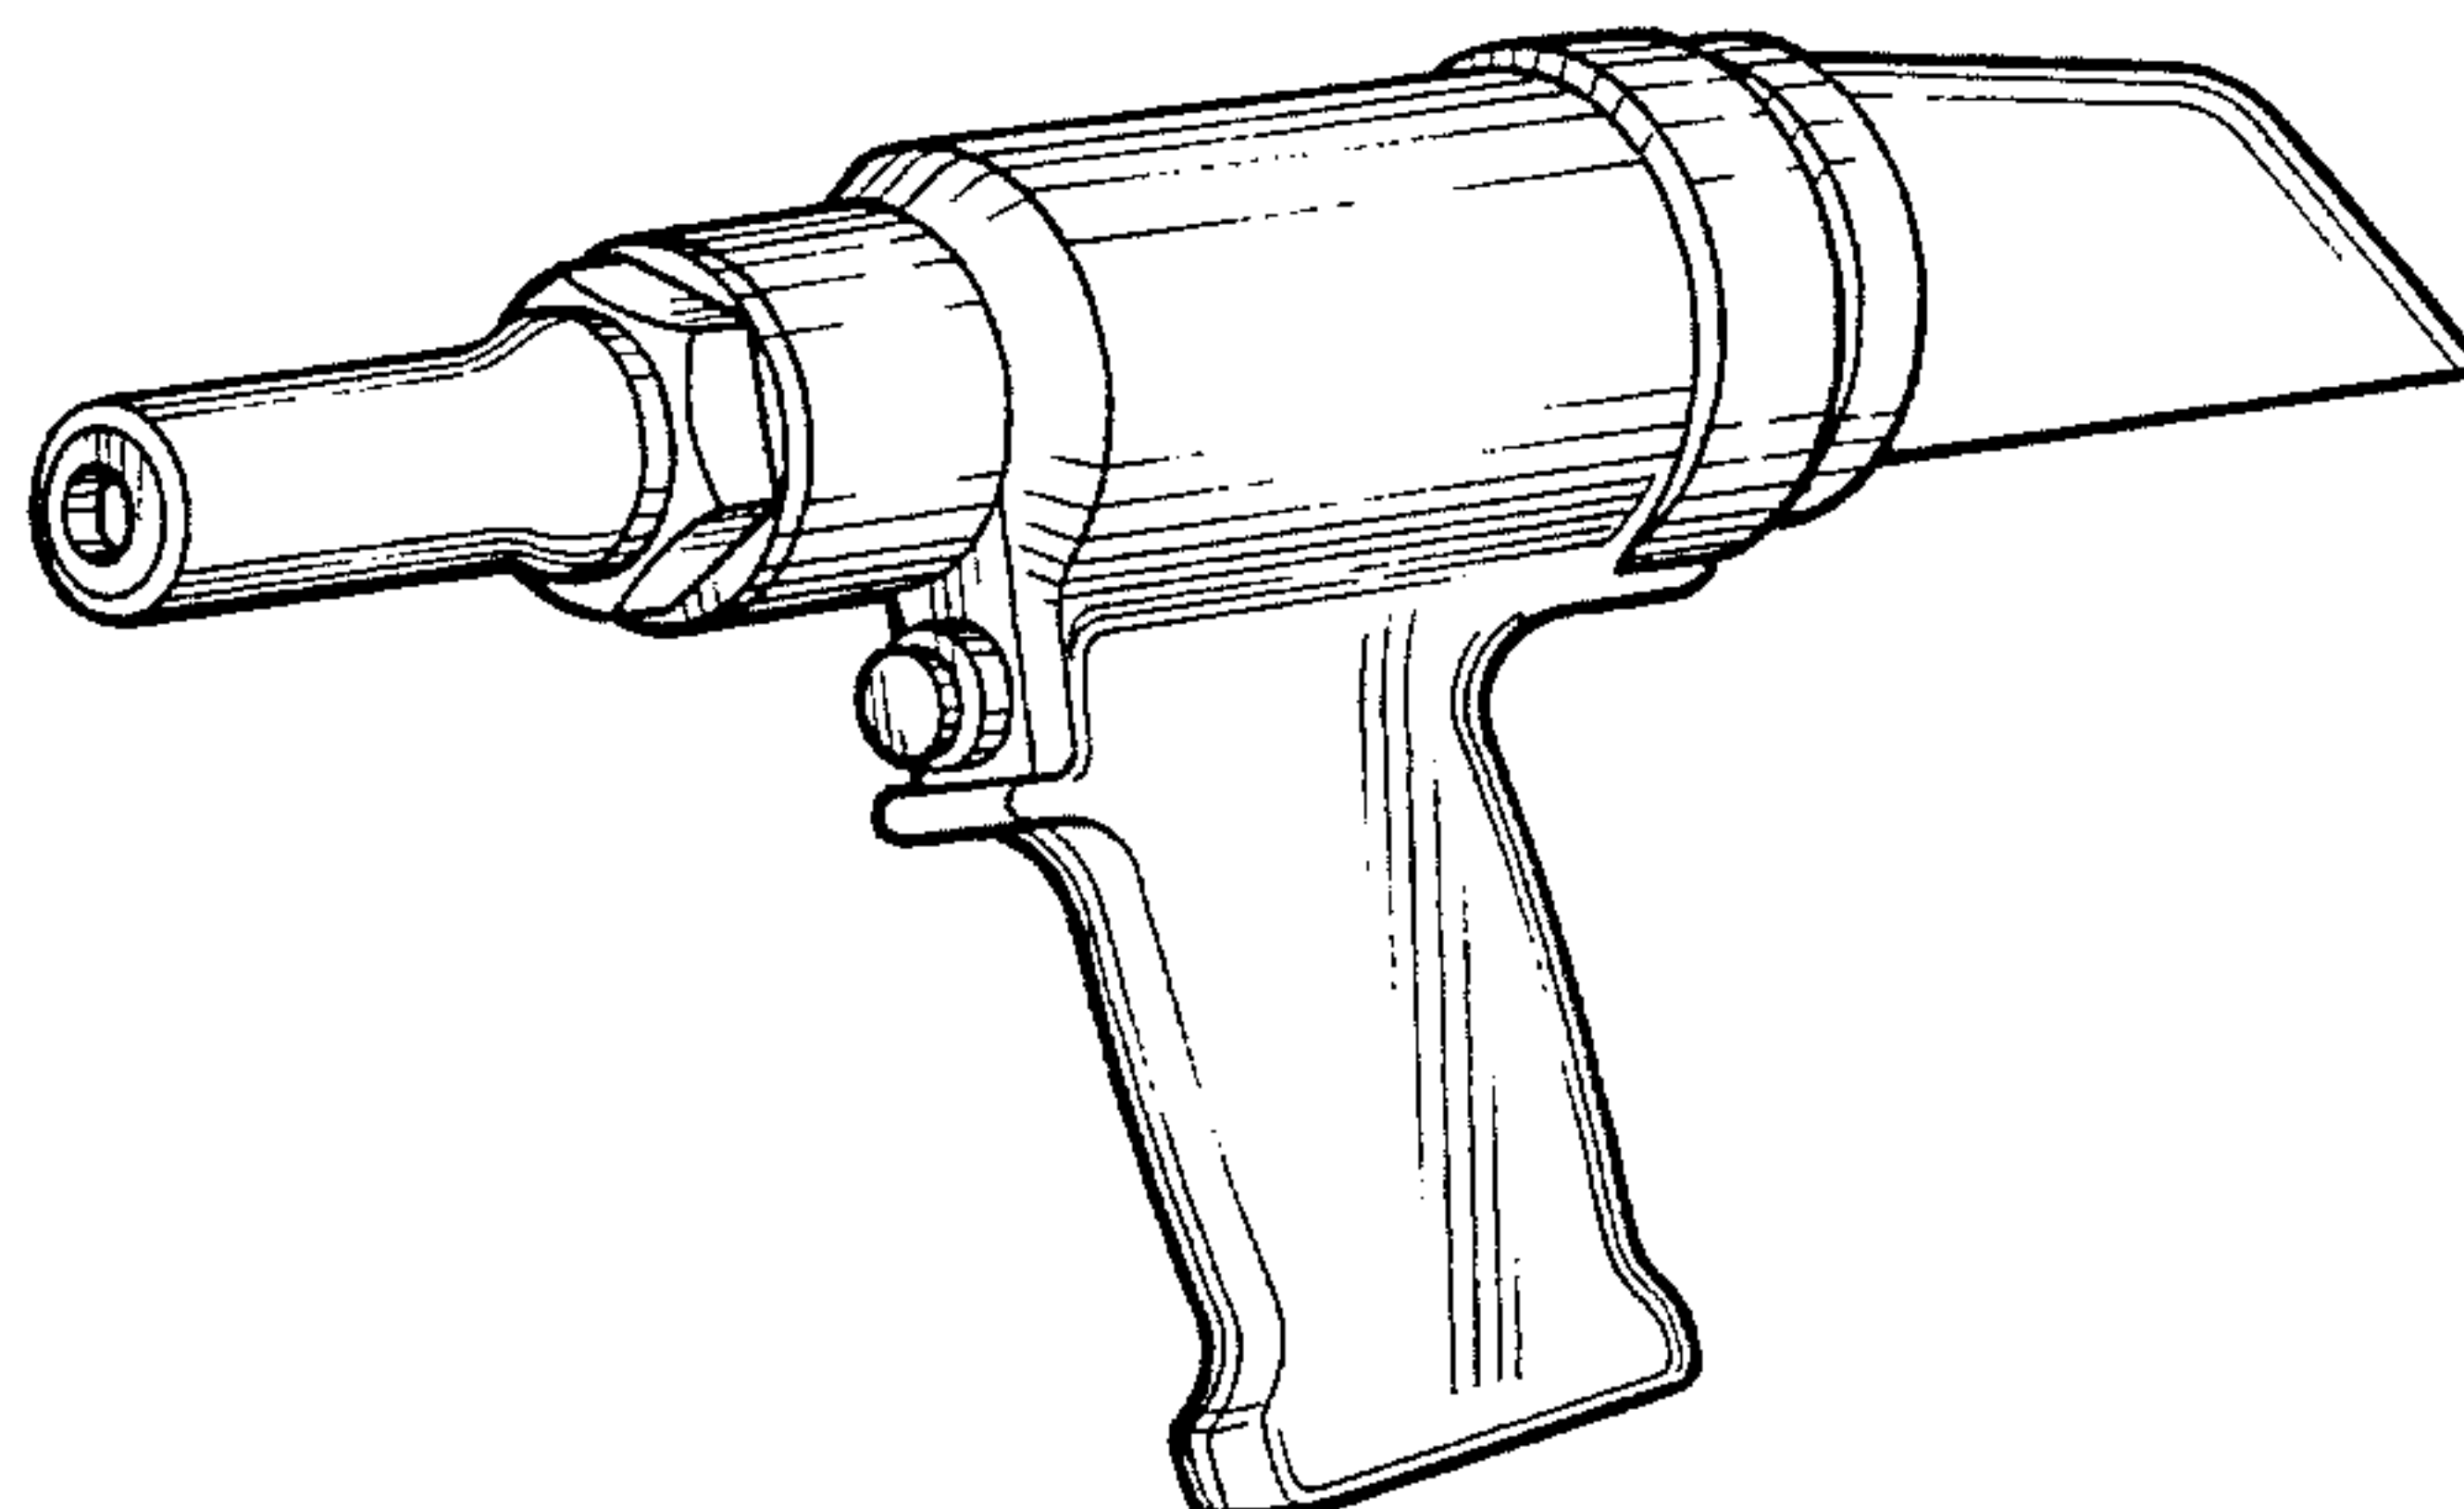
is a front elevational view of the installation tool for setting pull type fasteners of FIG. 8;
